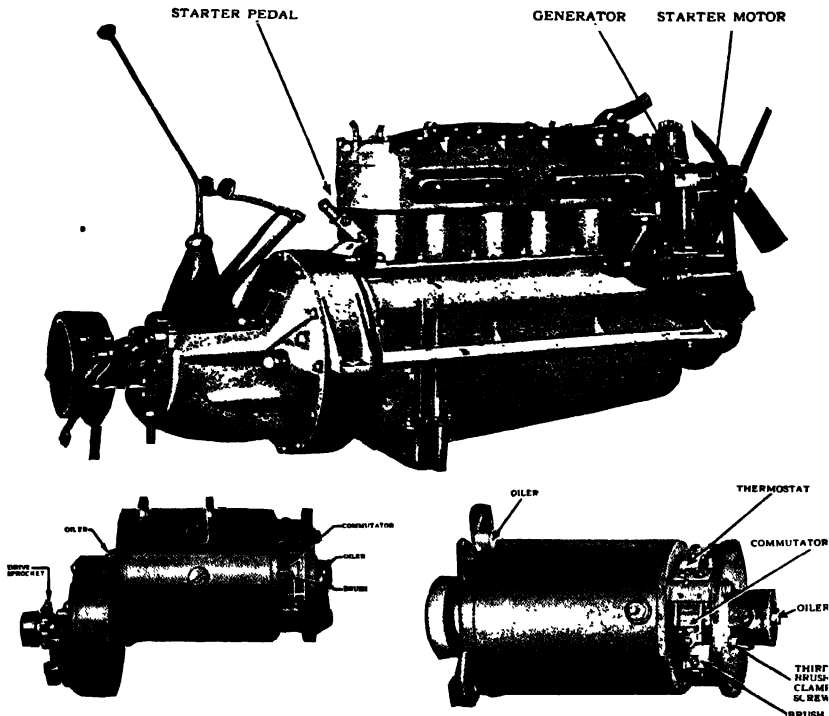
Starter and Generator Mounting and Individual Units. (Studebaker Big-six.)
